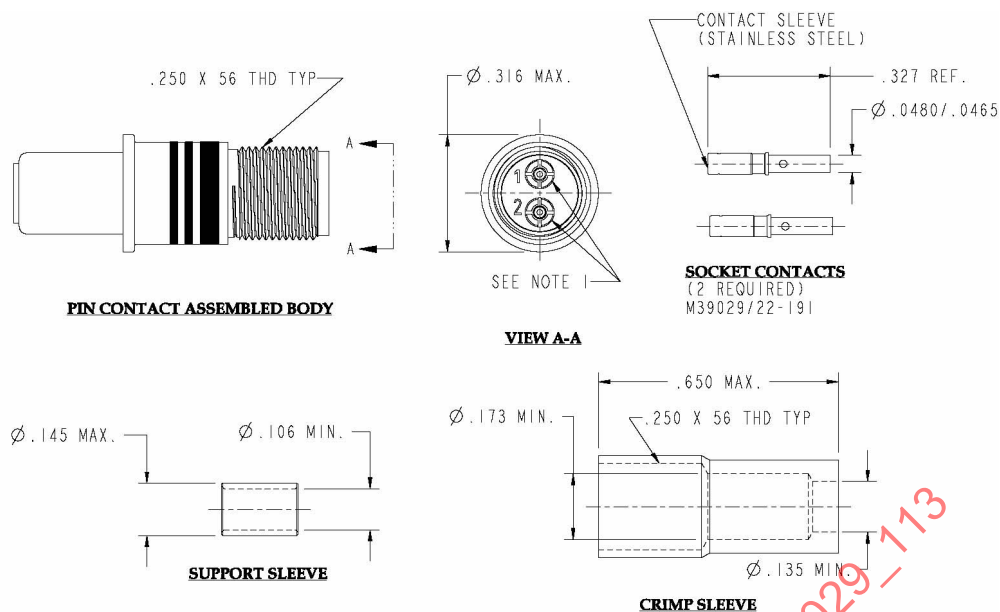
BIN CODE 625: UNASSEMBLED CONCENTRIC TWINAX CENTER CONTACT PIECE PART
